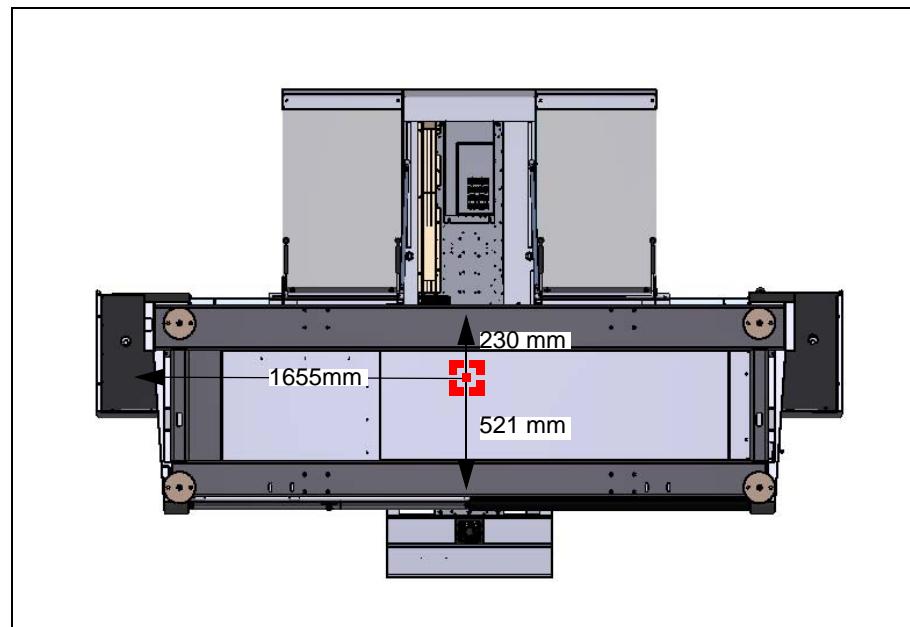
Center of gravity on MY100-10 machine (bottom view).
